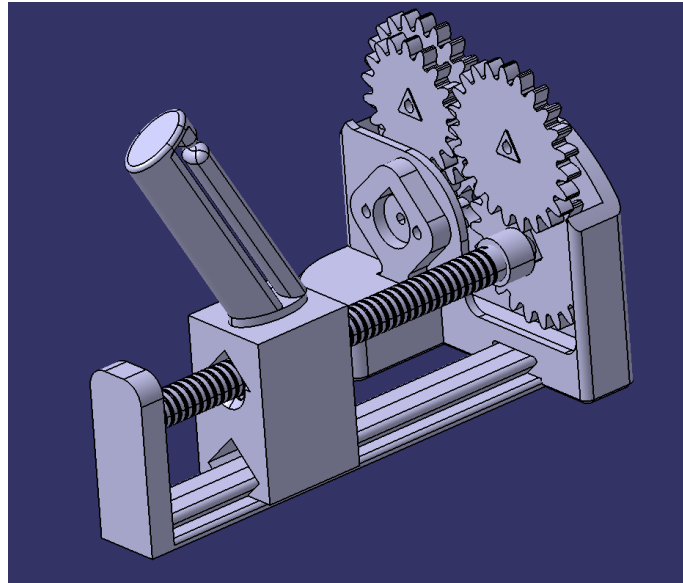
CAD model overview of the Lead Sled concept (showing the initial custom gearbox design).
